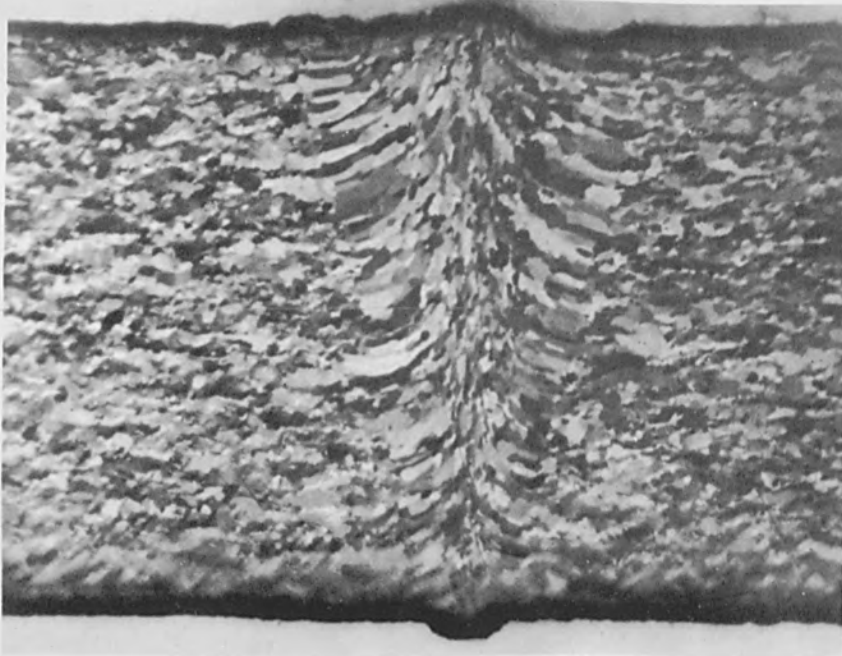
Weld Cross-section in 0.040-in. Beryllium
